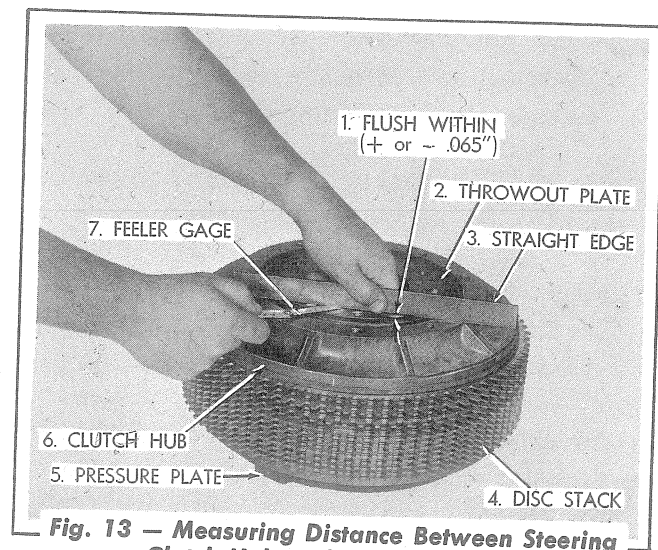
Measuring Distance Between Steering Clutch Hub and Throwout Plate
